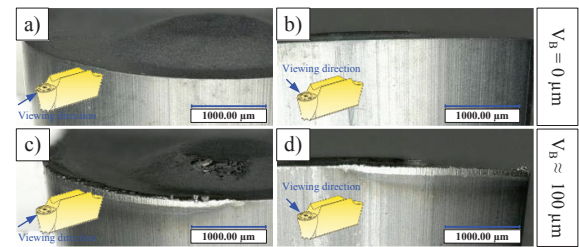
Photographs of the two levels of flank wear (a) and (b) unworn cutting edge; (c) and (d) cutting edge with constant flank wear.
